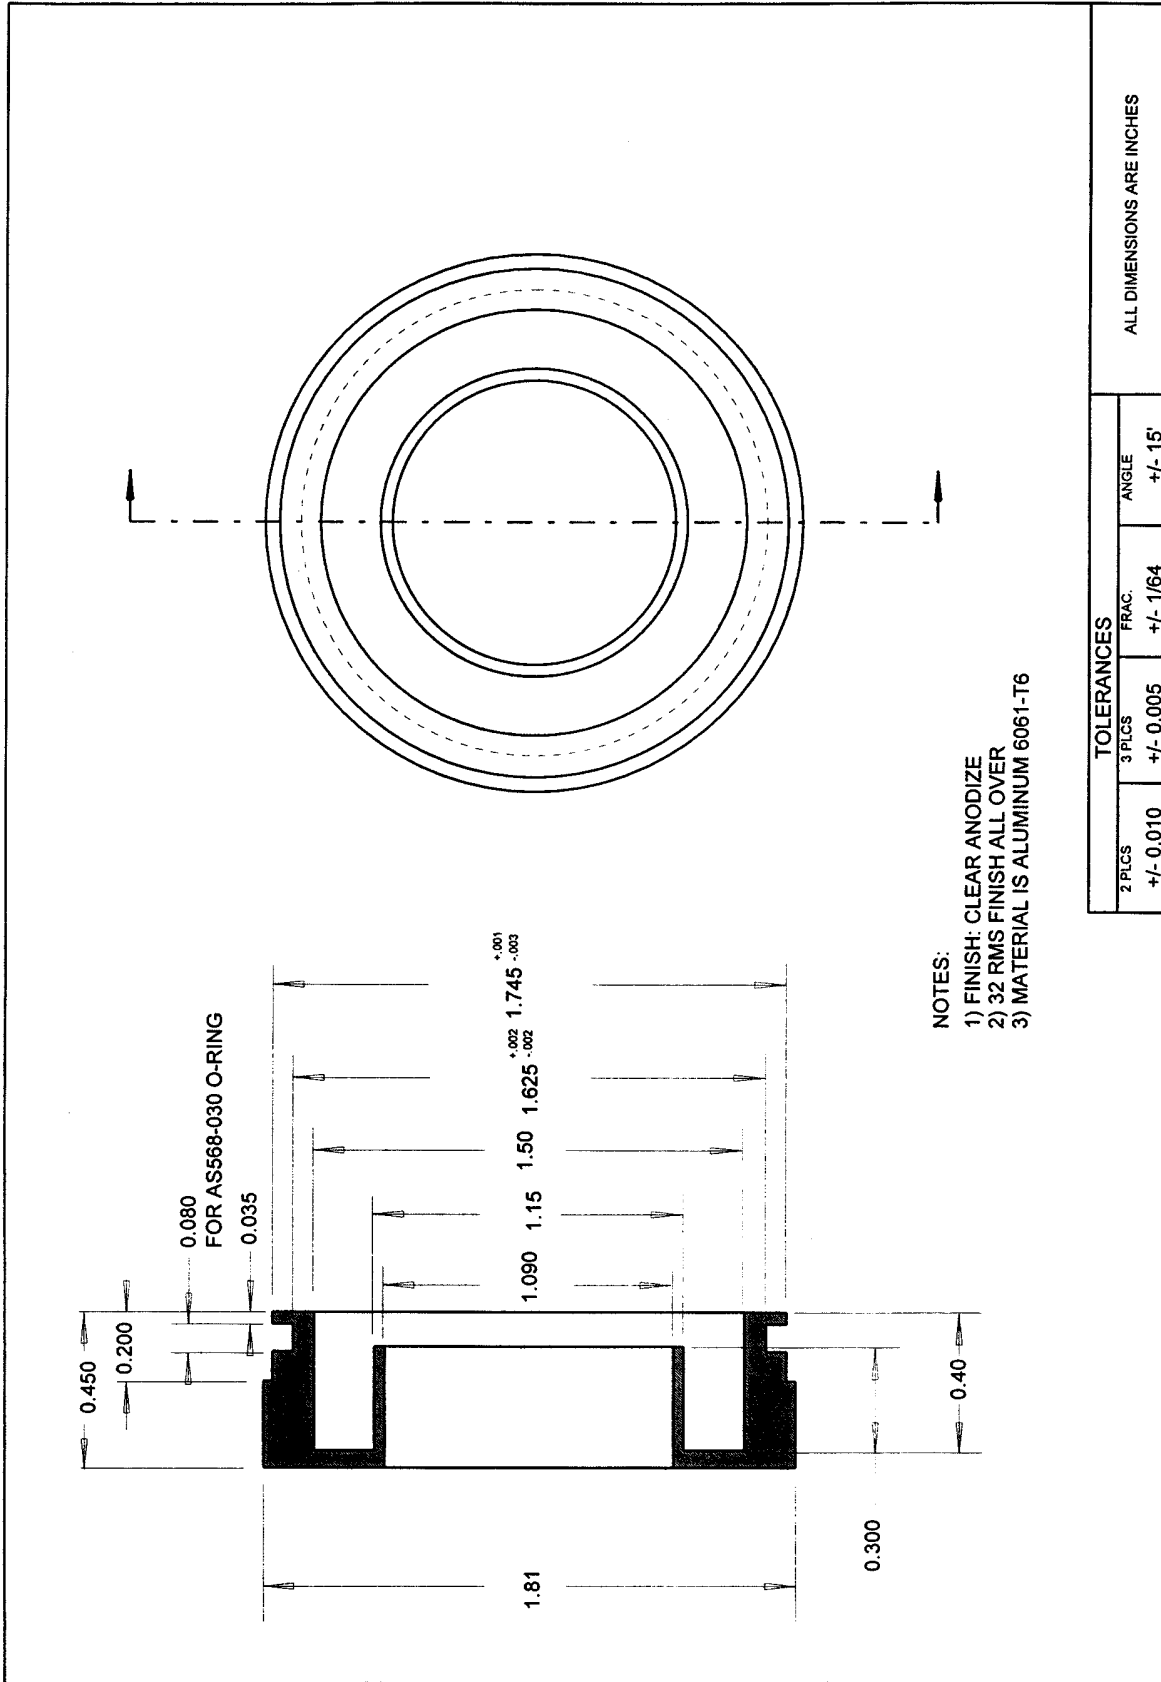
2.5-Micron Impactor Well, Upper Section
